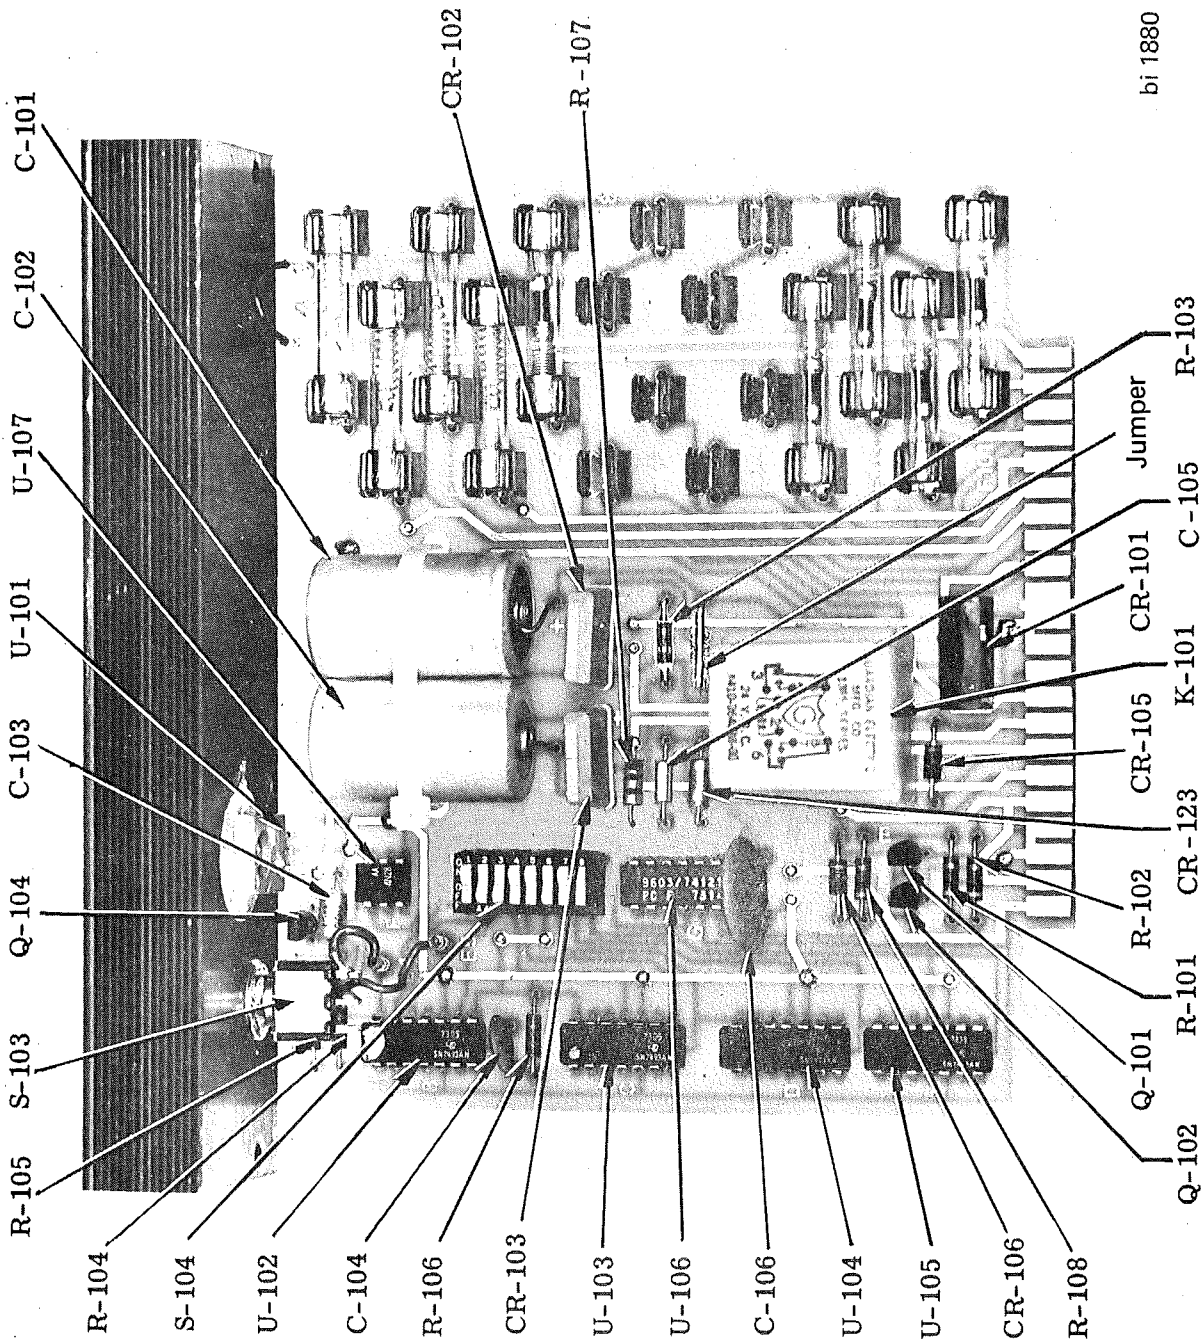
CONTROL TIMER BOARD ASSEMBLY
